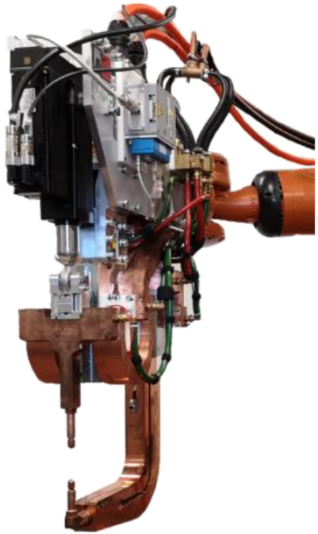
Resistance spot welding equipment and its most important technical features.
